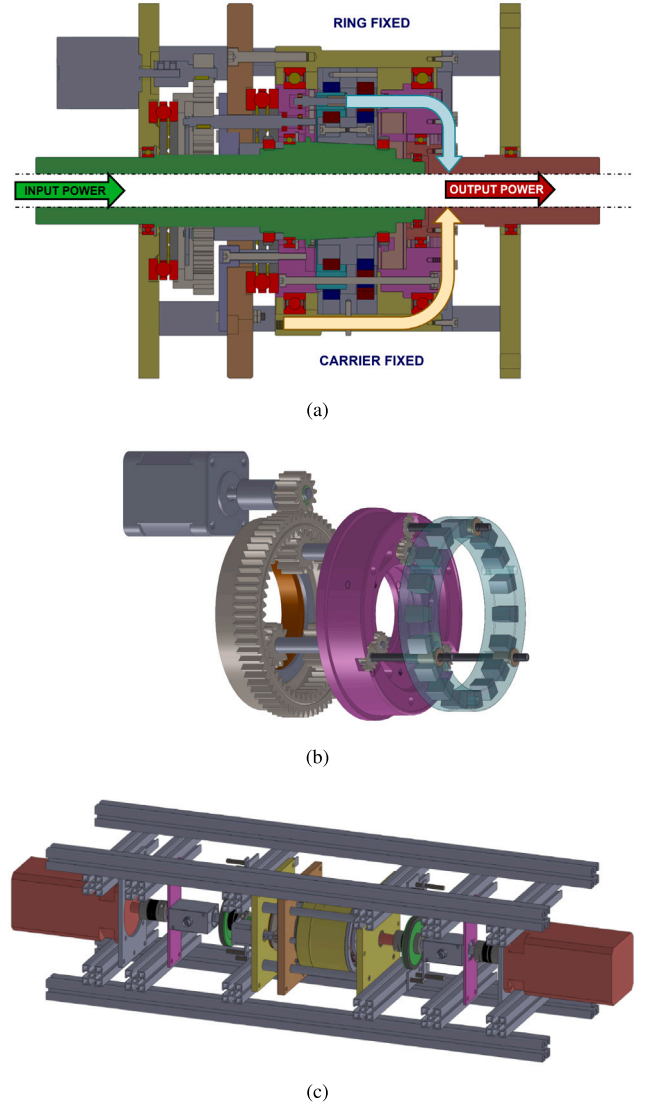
CAD model of magnetic gearbox prototype (a), with gearshift mechanism (b) and its test bench (c).
